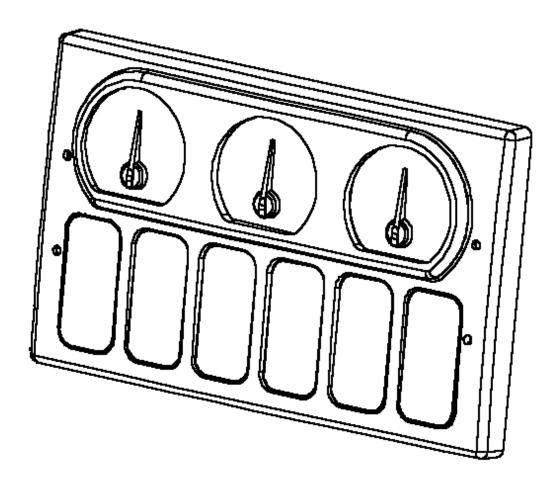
Auxiliary Gauge Switch Pack (AGSP)
